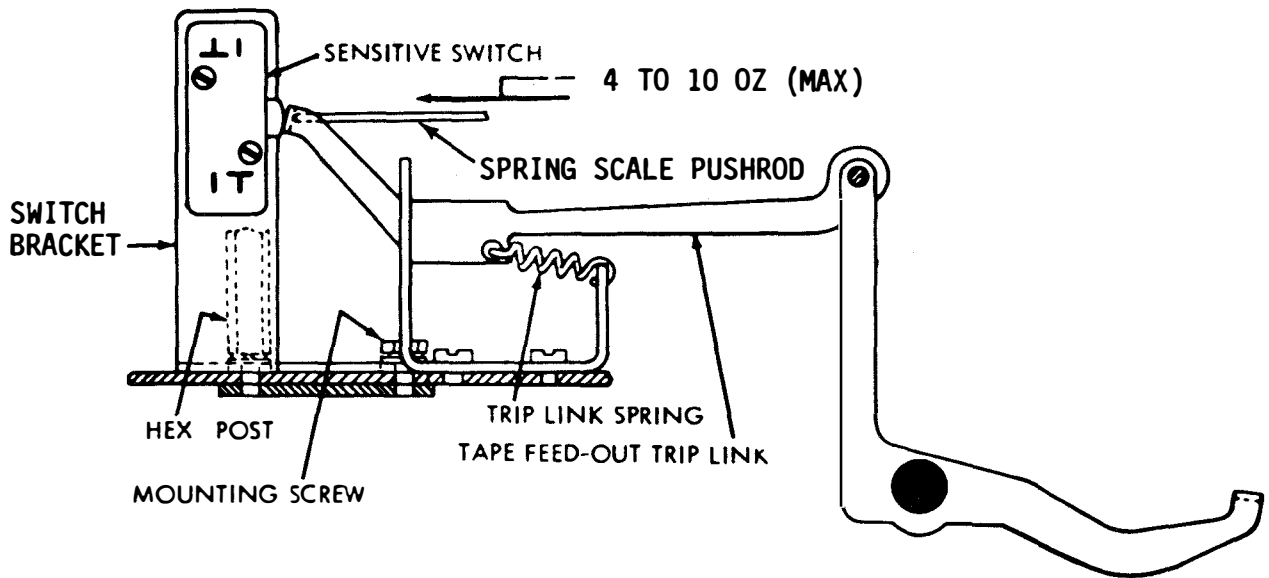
Tape Feed-Out Switch Bracket and Trip Link Spring
